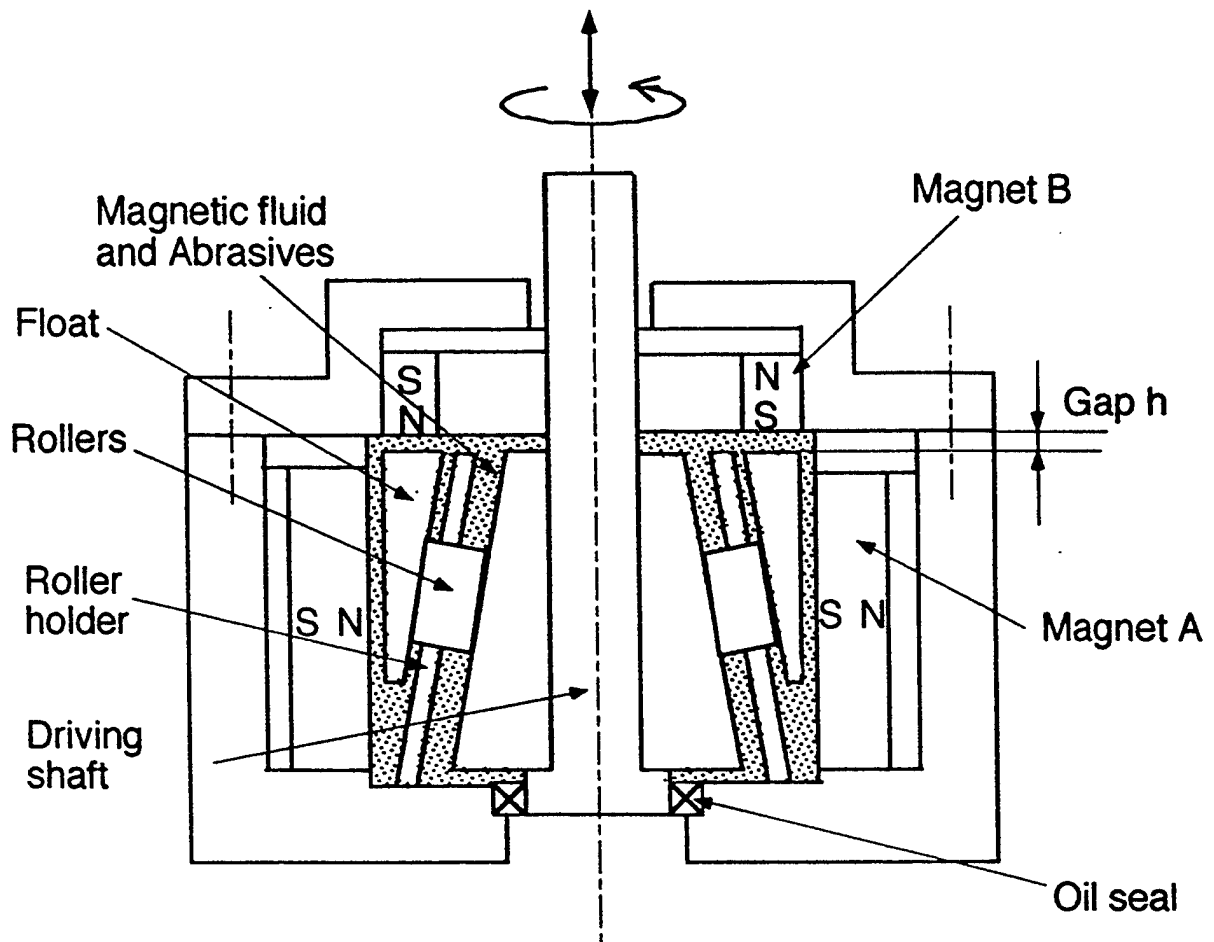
(b) A side section view of magnetic fluid grinding for ceramic rollers
